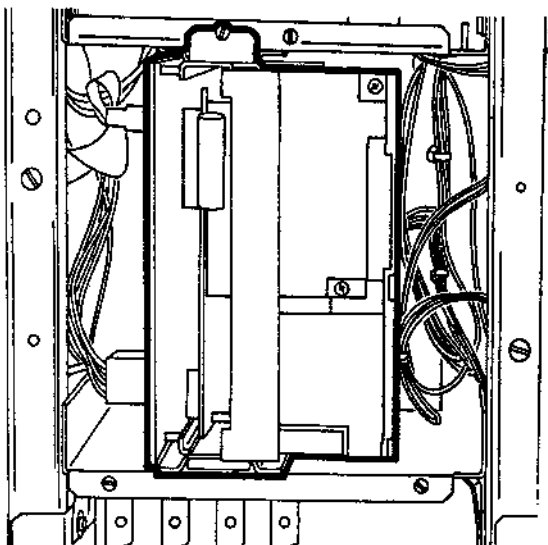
Rear View of Fixed Peripheral in SB1
